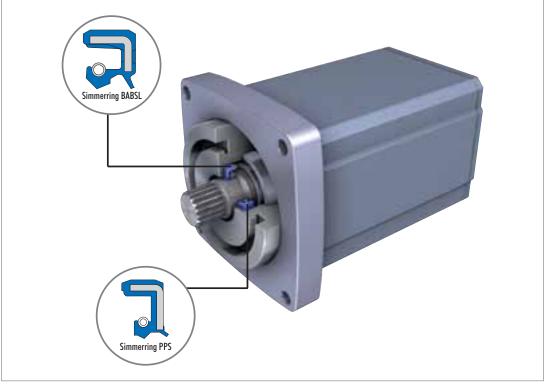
Simmerrings for rotating operating pressures in hydraulic pumps and engines
